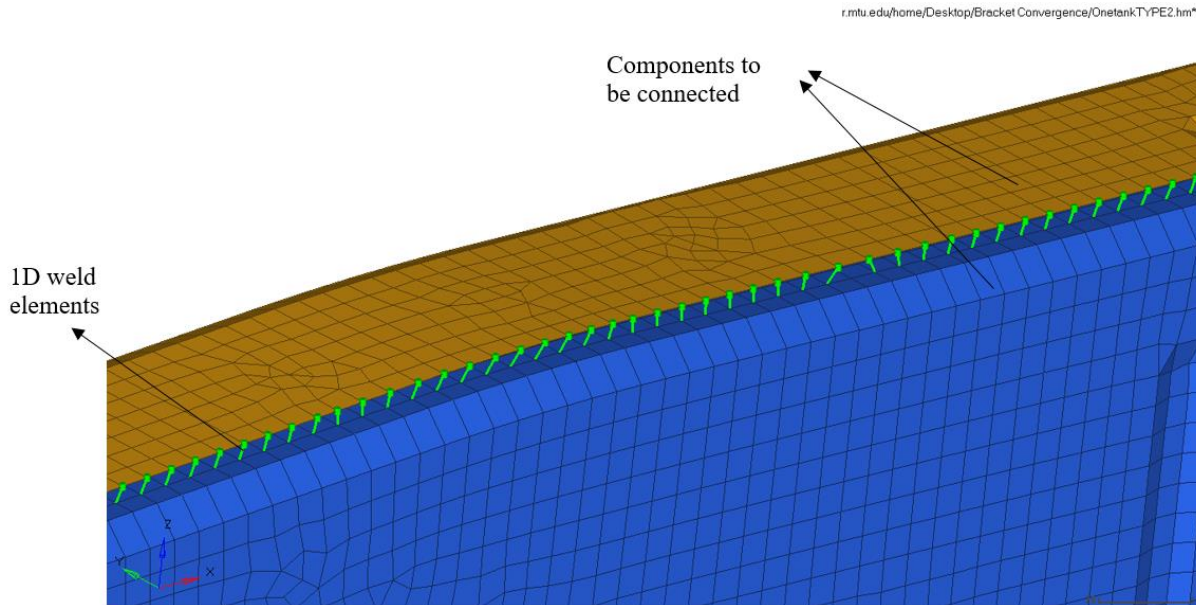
Detailed view of the 1D weld elements used to connect the components
